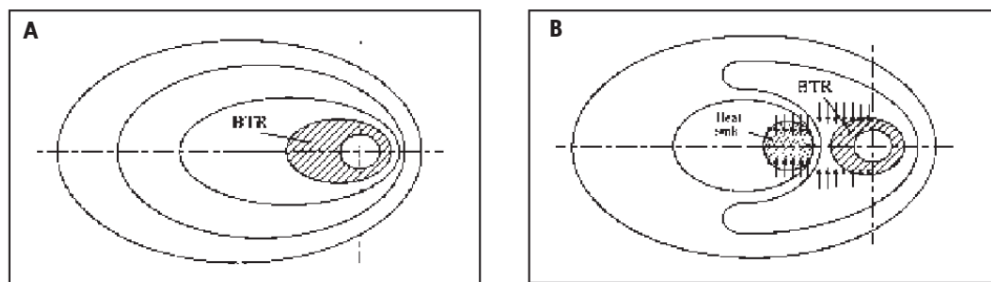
Schematic of the effects of a trailing heat on isotherms (A) conventional welding and (B) welding with a trailing heat sink [247]
